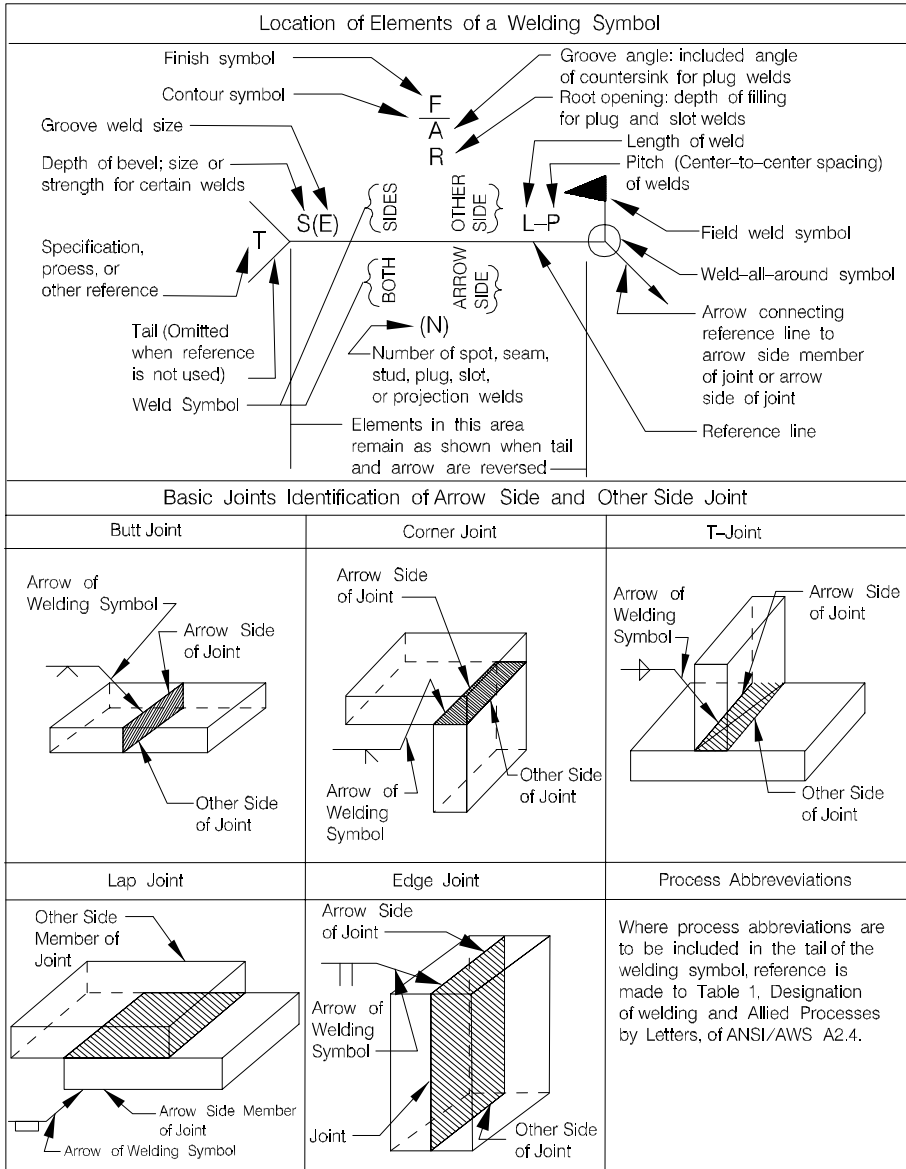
Standard Welding Symbols from AWS A2.4
